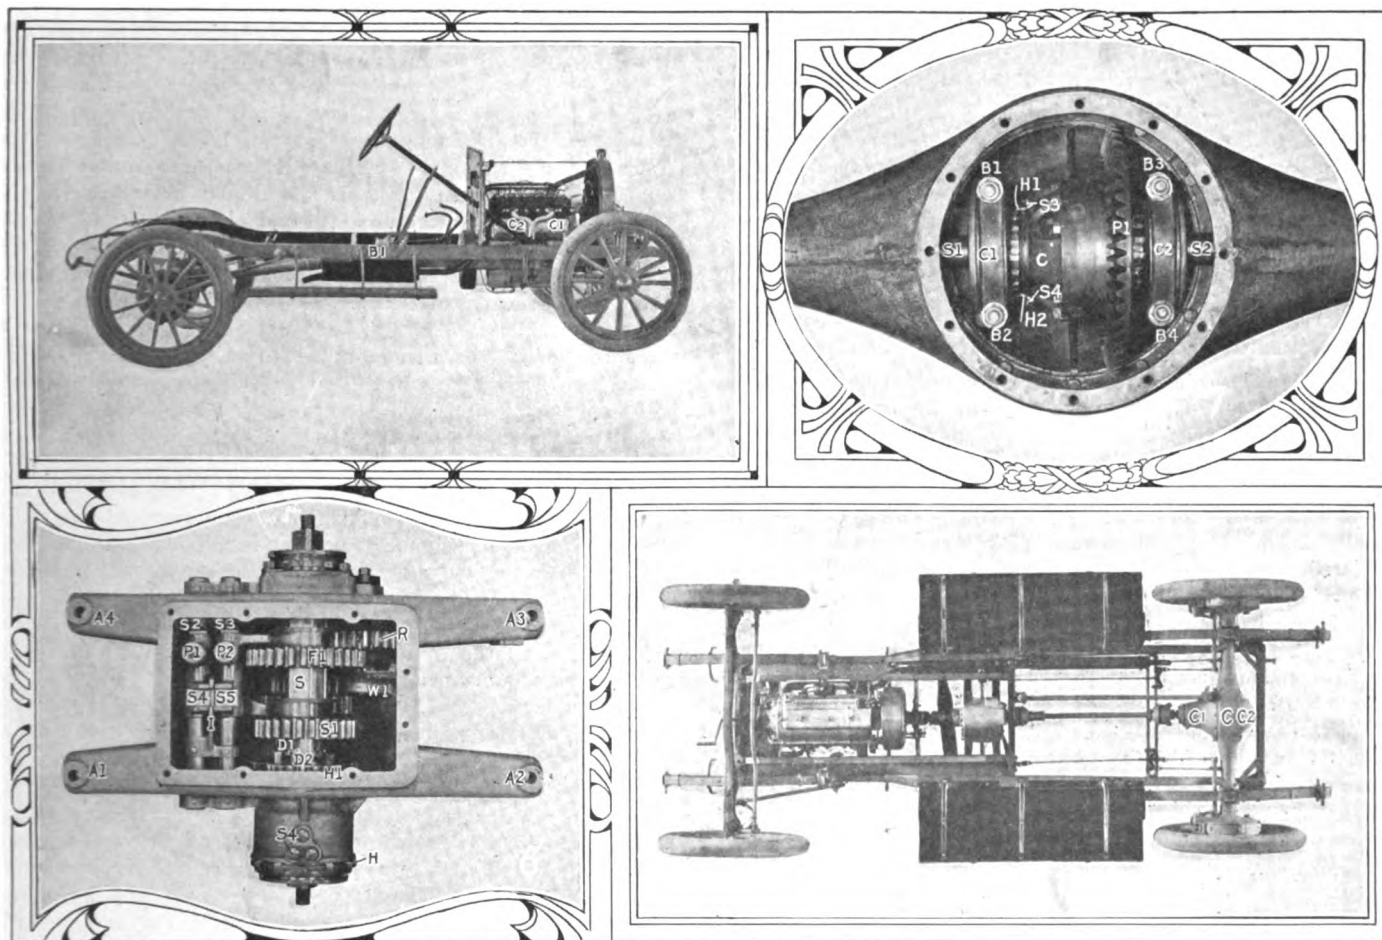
Side view of the Warren "35" chassis, from which it can be seen that cleanliness has been aimed at
